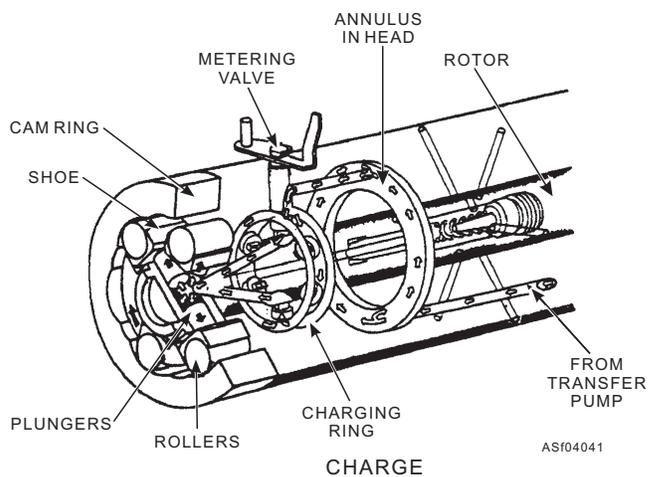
Rotor in charging position with the rollers between the cam lobes (DC pump).
